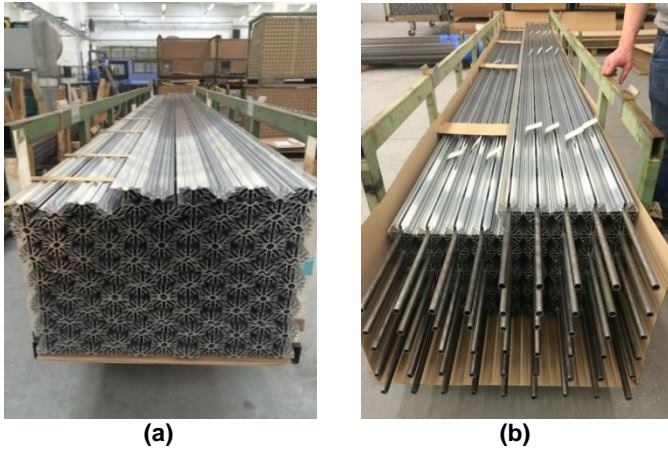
Finned-tube assembly showing (a) the prepared fin segments and (b) mounted finned tubes.
